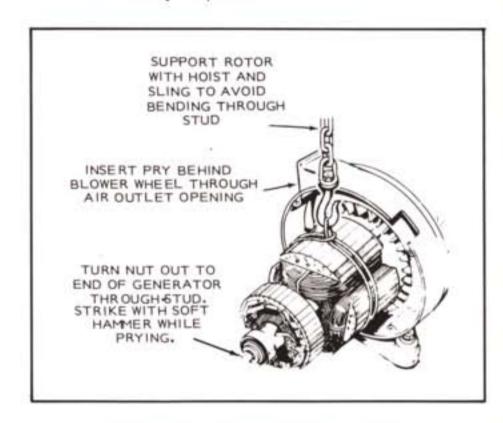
ROTOR REMOVAL (ENGINE MOUNTED GENERATOR)
